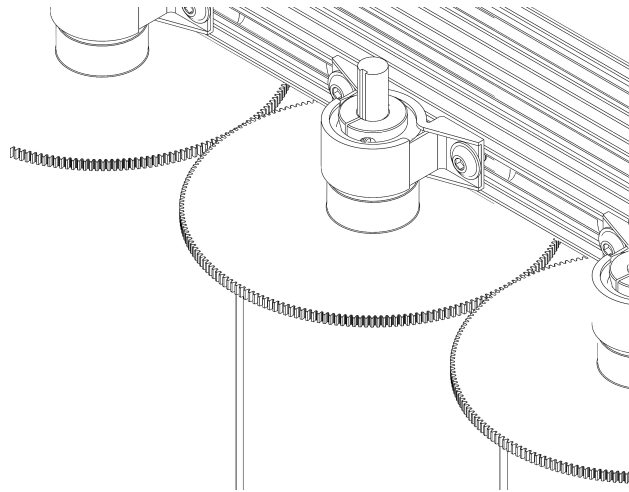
An isometric view showing the gears on top of the airfoils, the bearings, and shafts.
